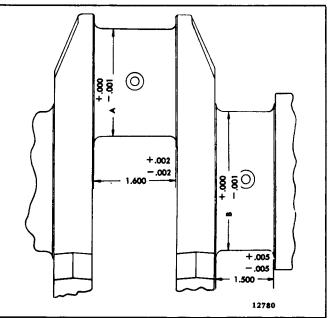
Dimensions of Crankshaft Journals - In-Line Engine
